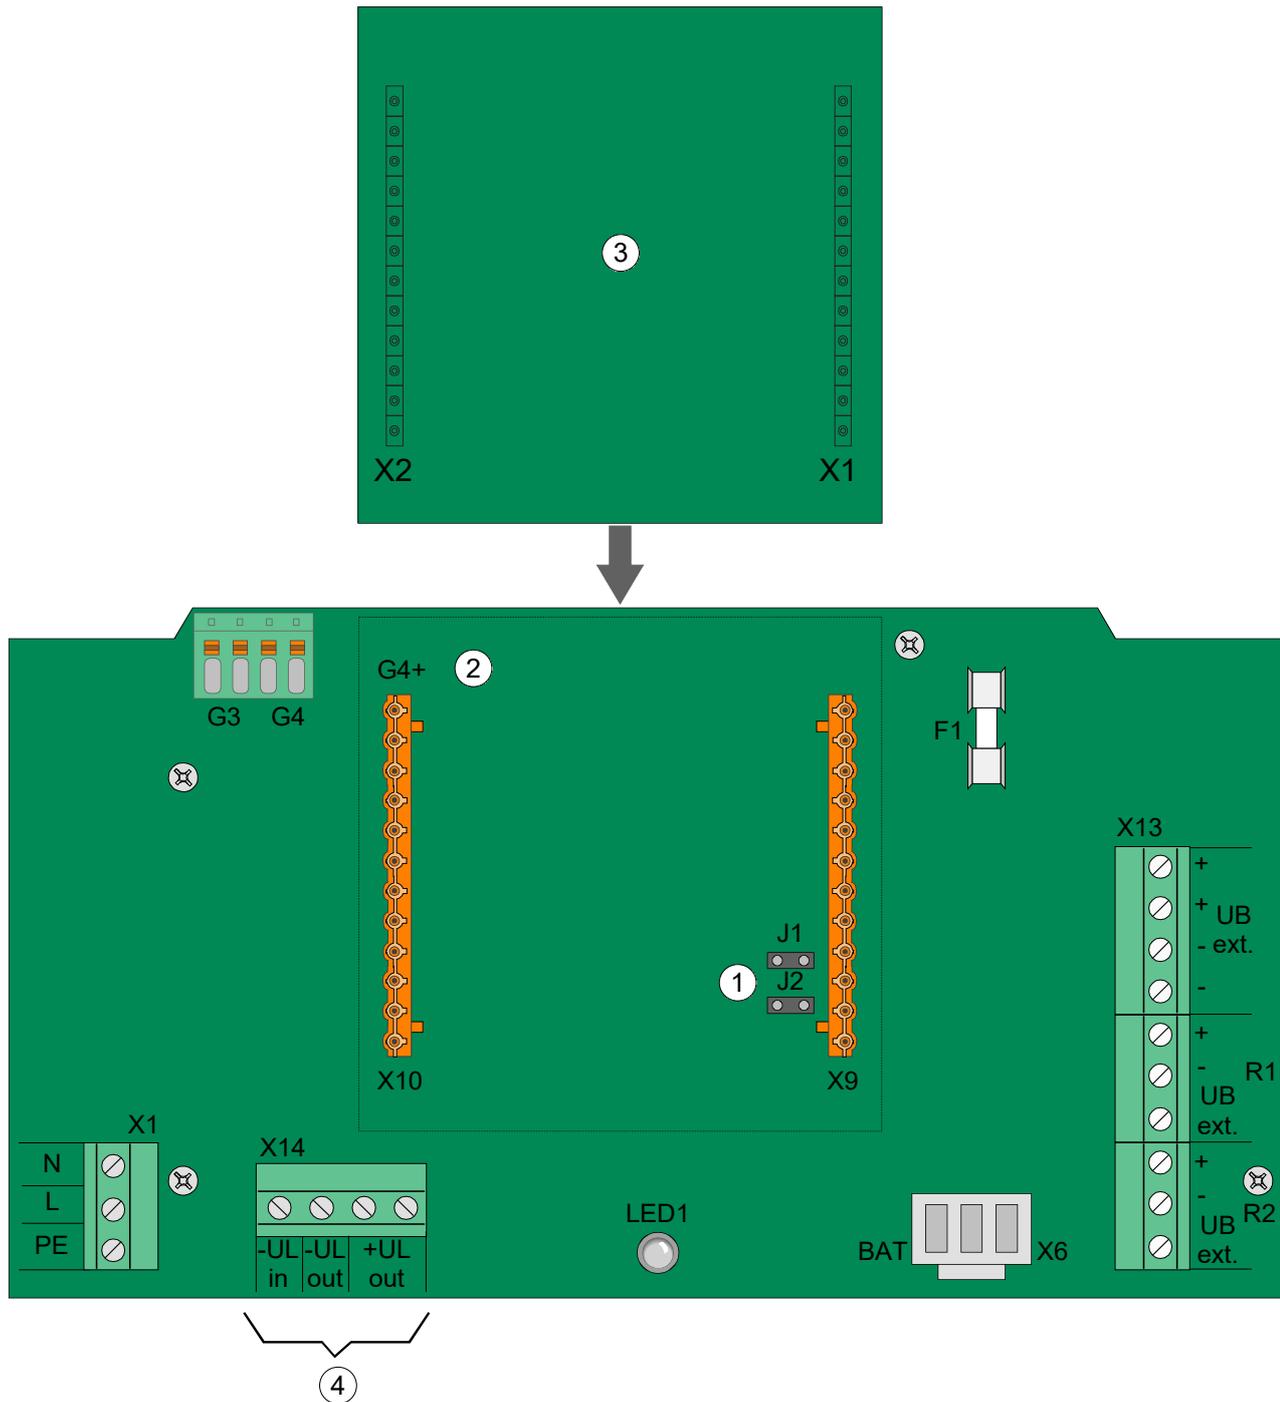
Attach the esserbus® transponder to the Power Supply's board so that the soldered side is visible
